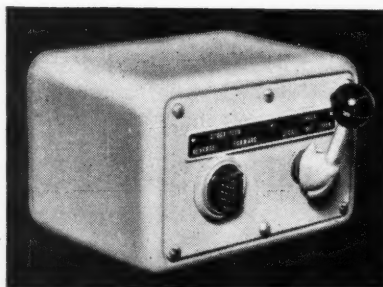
Close-up view of control panel of hydraulically operated bar feed and collet chuck
